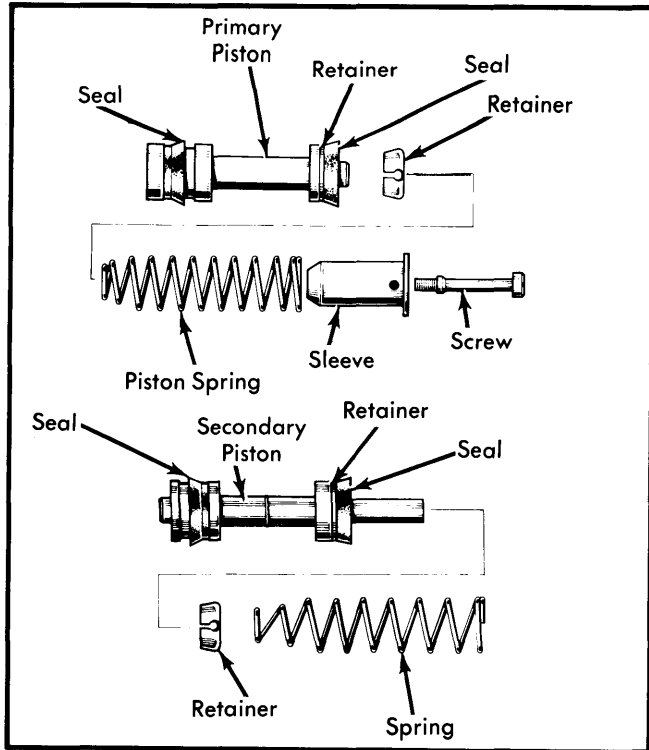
Exploded View of Master Cylinder Piston Assemblies
